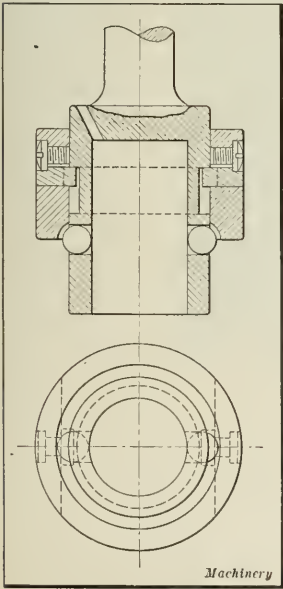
Modern Tool Co.'s Quick-change Ball Chuck
